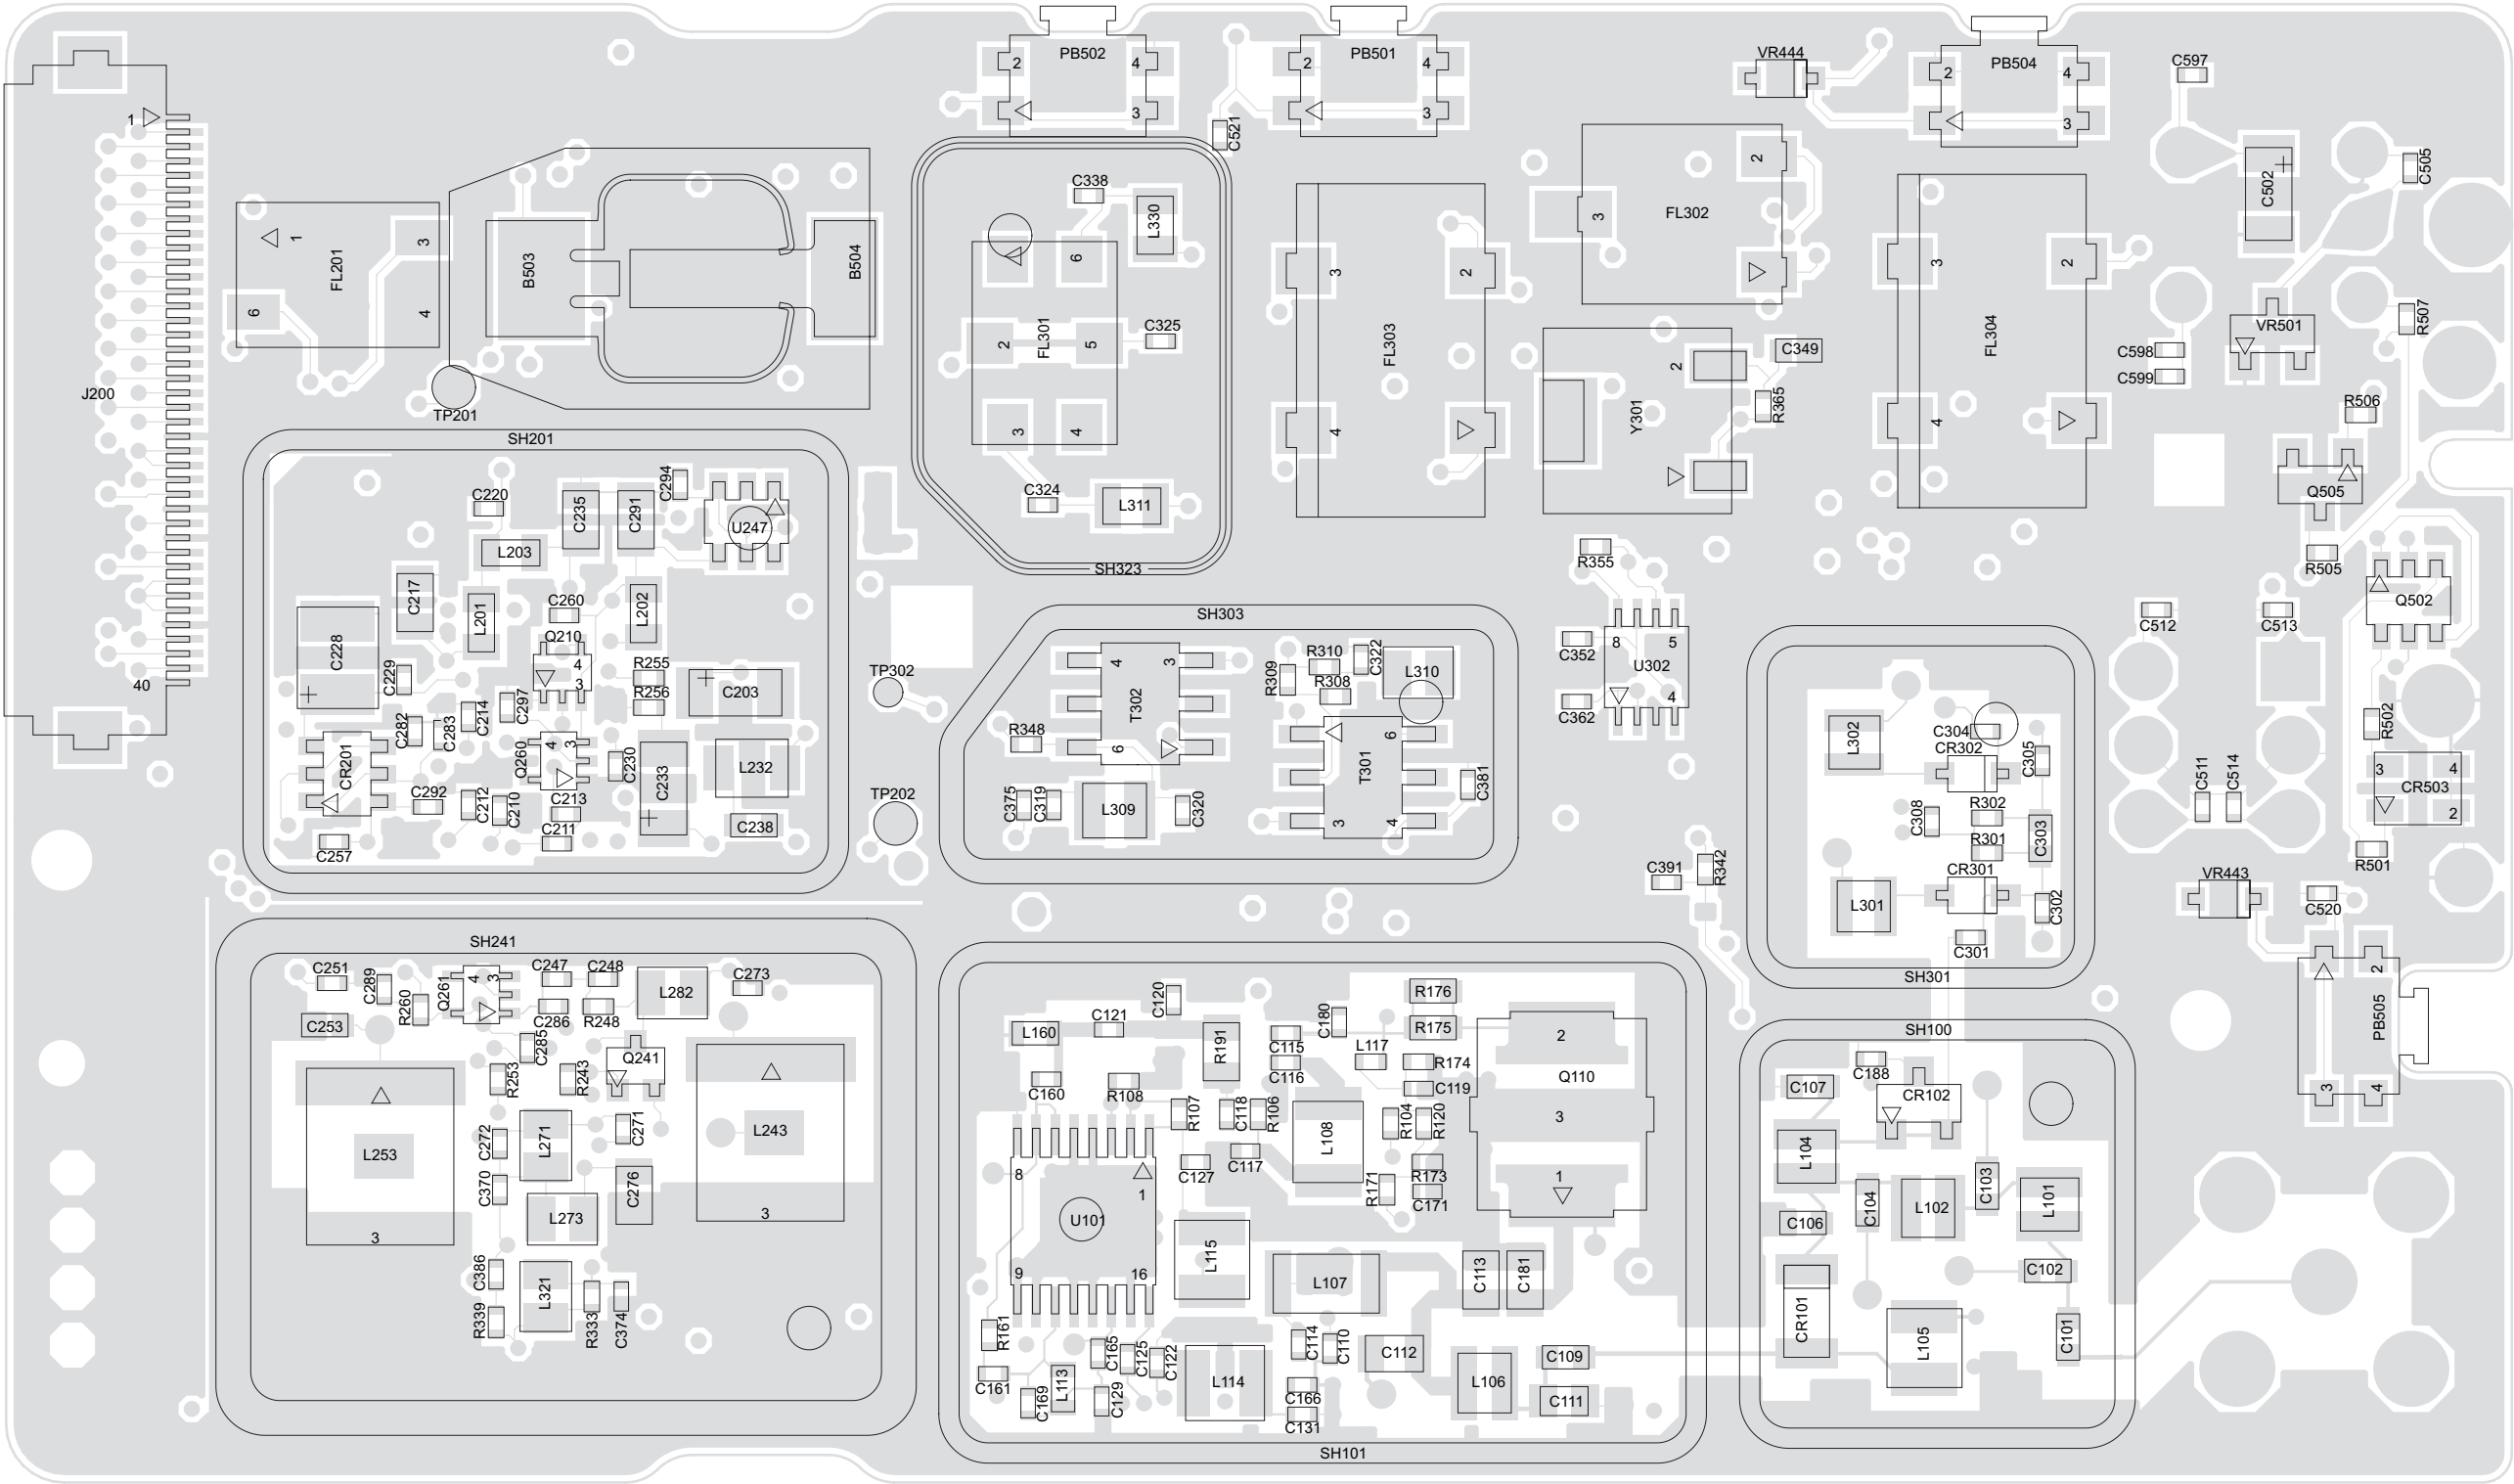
UHF Band 2 (450-527MHz) Main Board Top Side PCB No.8471475L01
